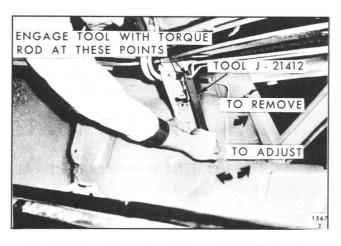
Rear Compartment Torque Rod Adjustment - "X-27, 69" Styles
